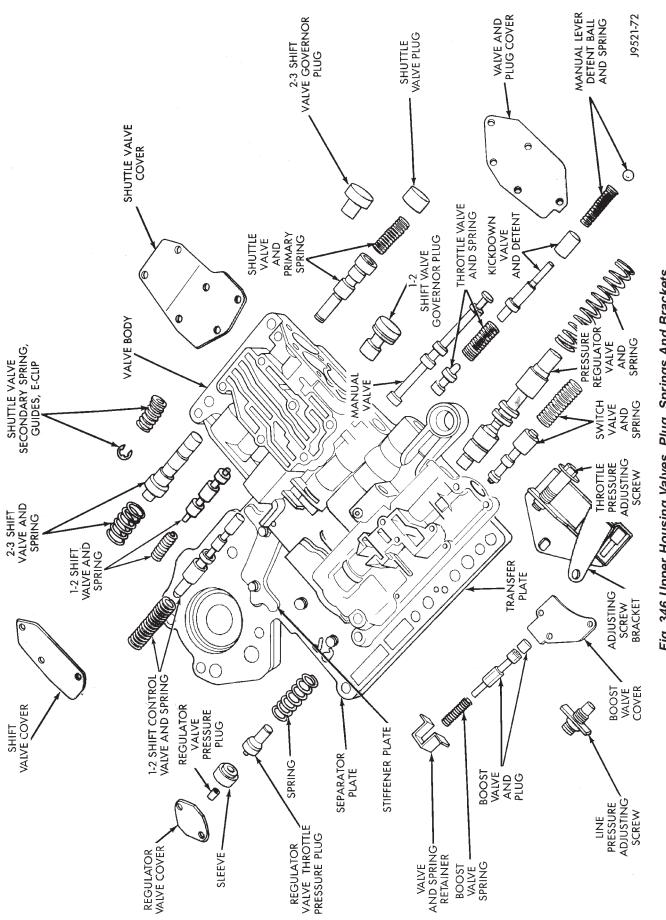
Upper Housing Valves, Plug, Springs And Brackets
